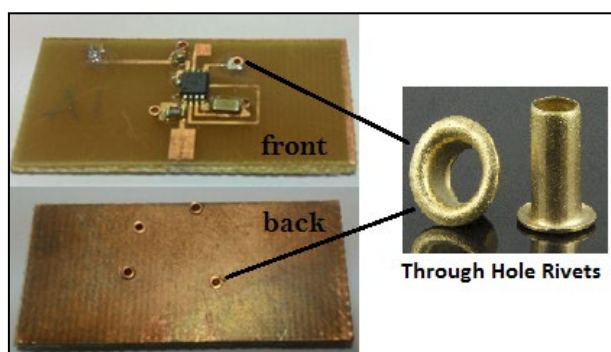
Through-hole rivets to connect the front and the back of the circuit
